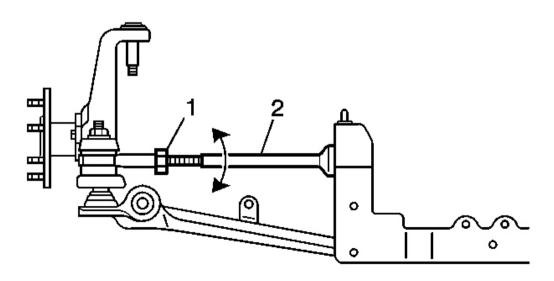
Rear Suspension Adjustment Link Lock Nut & Inner Tie Rod Courtesy of GENERAL MOTORS CORP.
